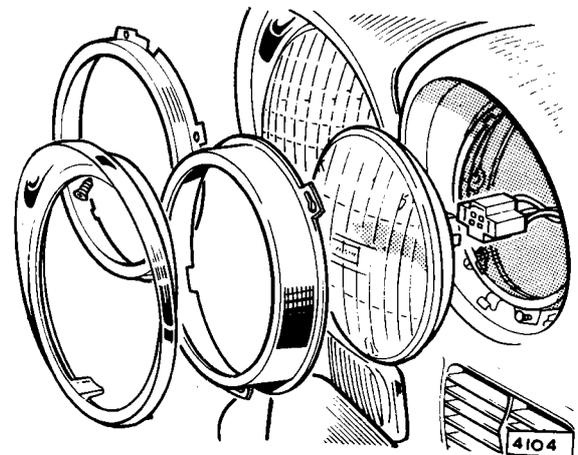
The outer and inner headlight unit removal (sealed beam)
